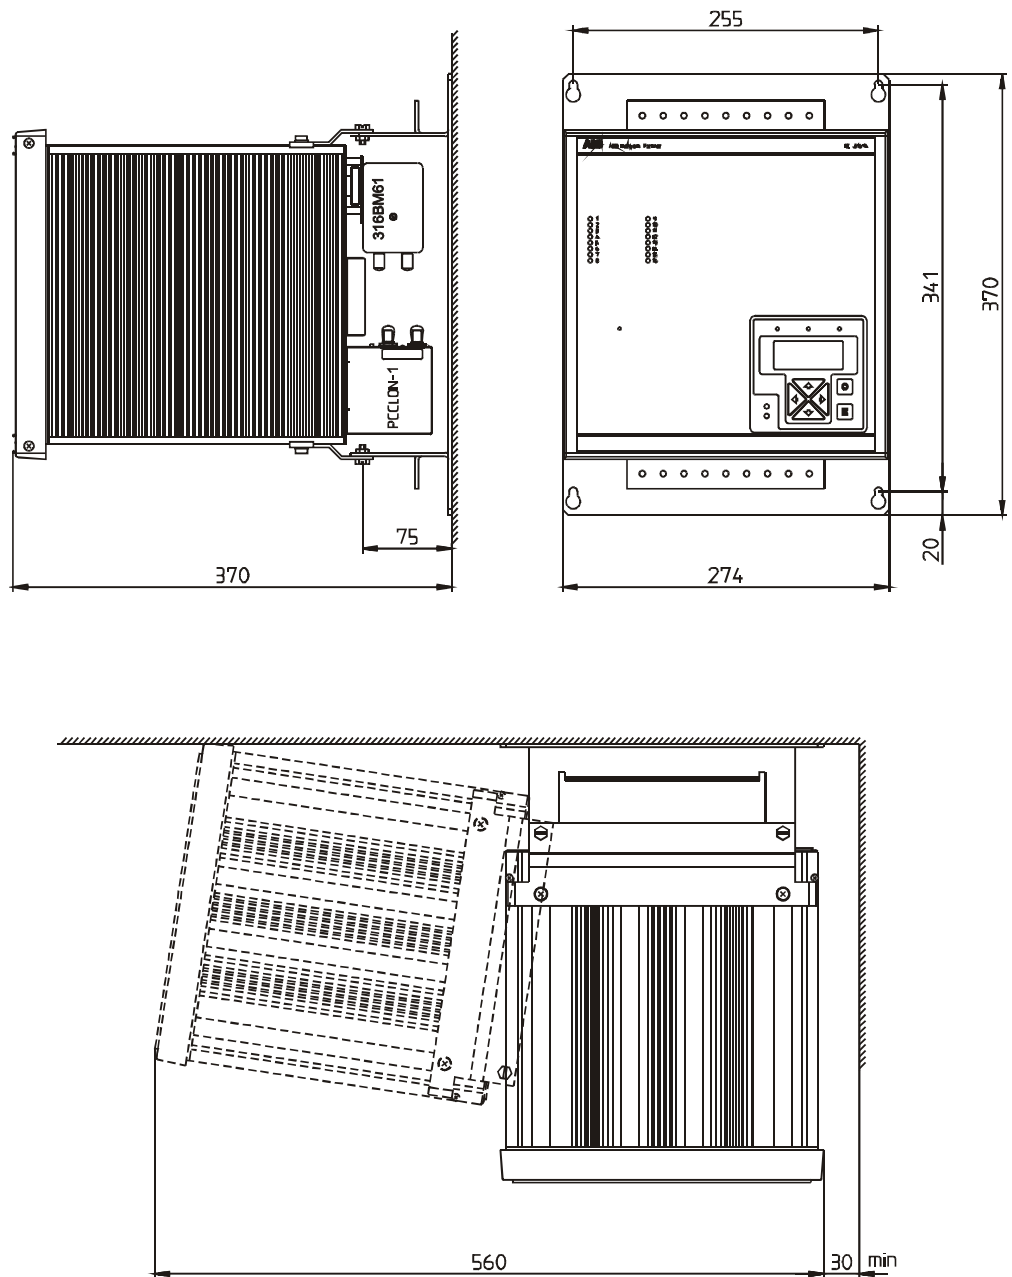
Surface mounting, casing able to swing to the left, rear connections. Size N2 casing
